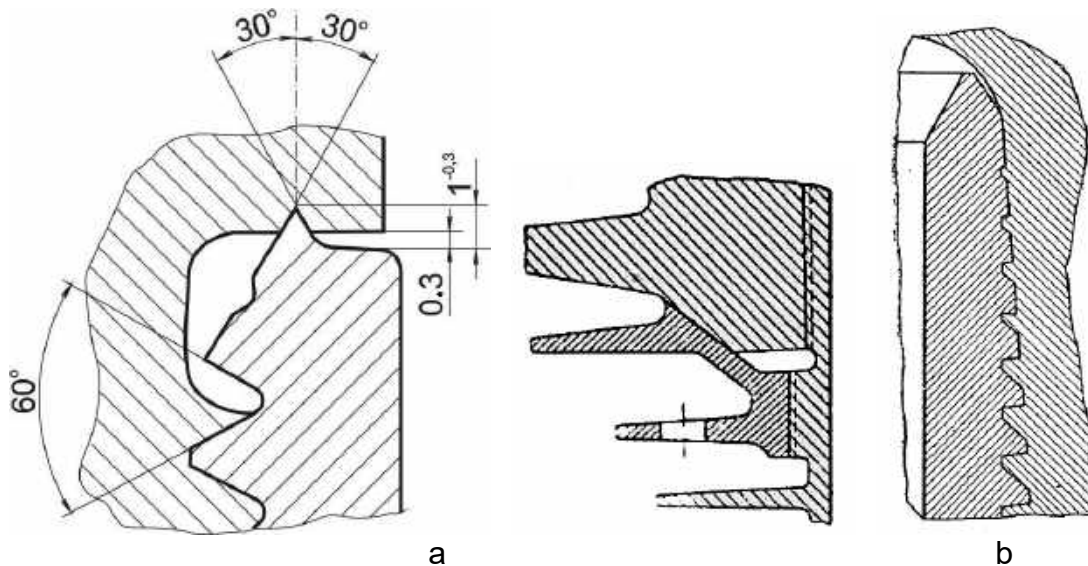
Methods to seal the joint between the cylinder and the crankcase:
